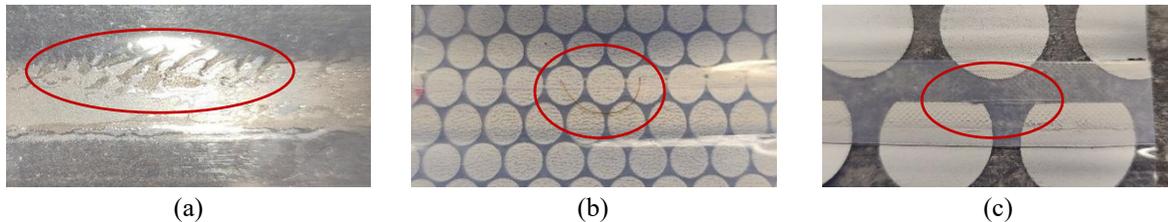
Detected irregularities in visual tests; (a) irregular weld seam edge, (b) small inclusion, (c) gap between butted joining partners
